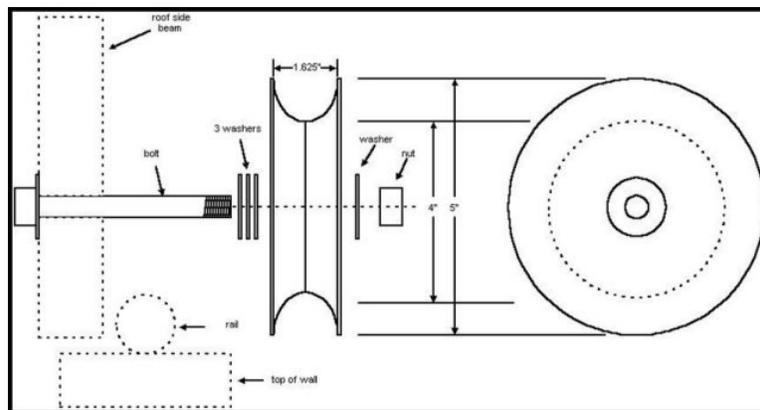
A cross section drawing of the chain-link fence caster and rail system for the roll-off-roof observatory described in the text. The caster is bolted to the roof side beam using several
